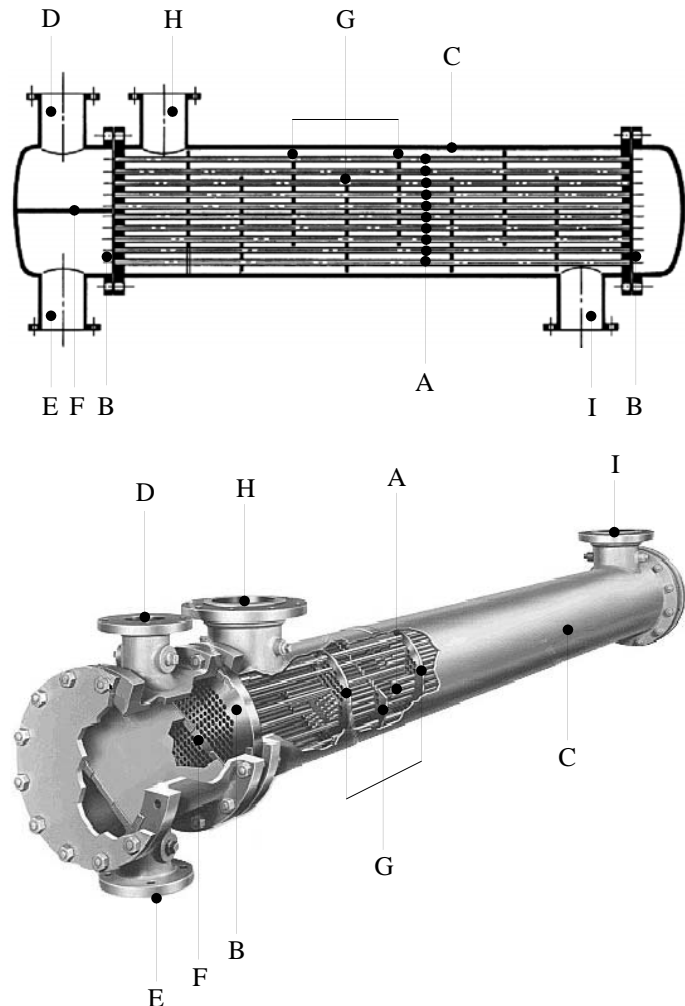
Diagram of typical shell and tube heat exchanger. A: Tubes, B: Tube Sheets, C: Shell, D: Tube-Side Inlet (Outlet) Nozzle, E: Tube-Side Outlet (Inlet) Nozzle, F: Pass Divider, G: Baffles, H: Shell-Side Inlet (Outlet) Nozzle, I: Shell-Side Outlet (Inlet) Nozzle.
